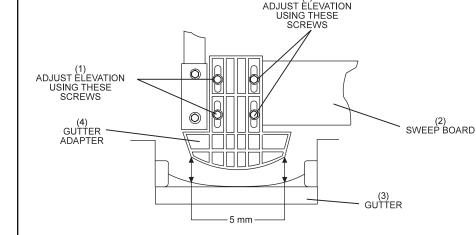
Sweep Board Gutter Adapter Adjustment.
